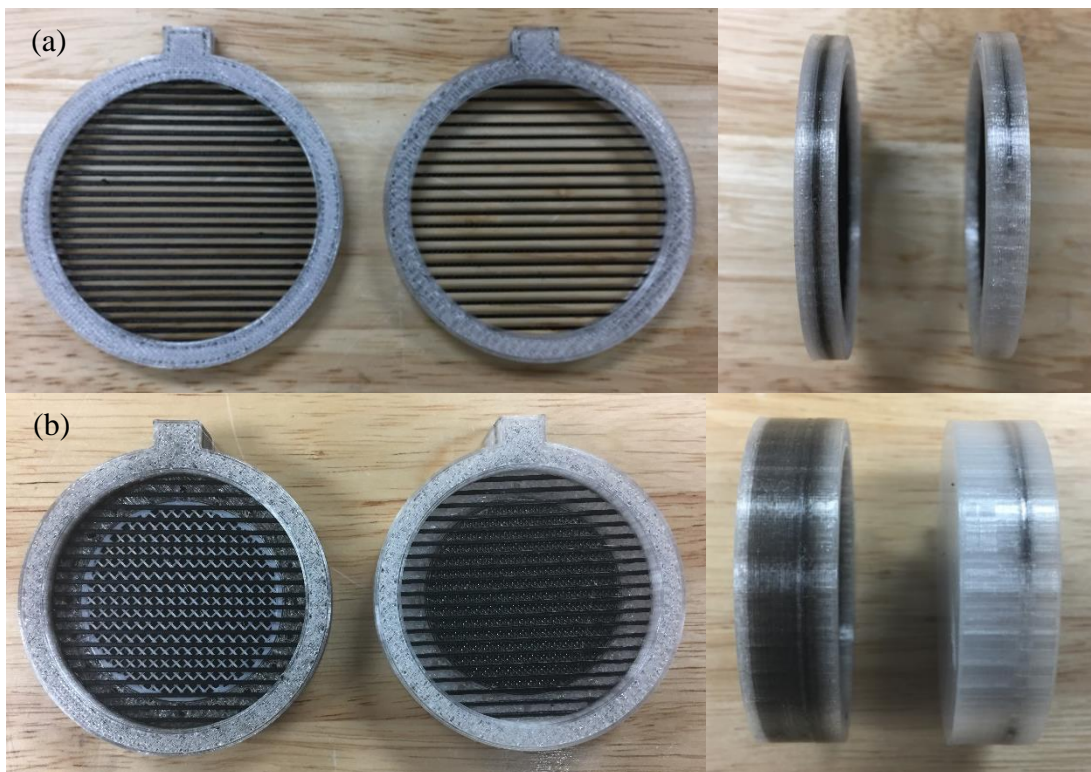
(a) Gate and (b) Faraday plate assemblies 3D printed on the Ender 5 (left) and ToolChanger (right) systems viewed from the front and side. Support filament is shown in the Faraday plate assemblies.
